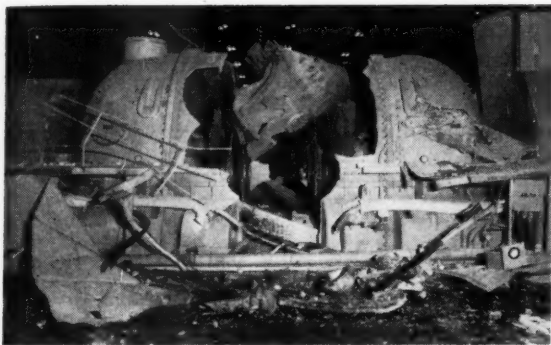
Close-up of low-pressure Unit No. 4 at Ridgeland Station. Center section of turbine-spindle shaft with eight rows of blades is missing. Stub shafts and double exhaust blades remain in place.
